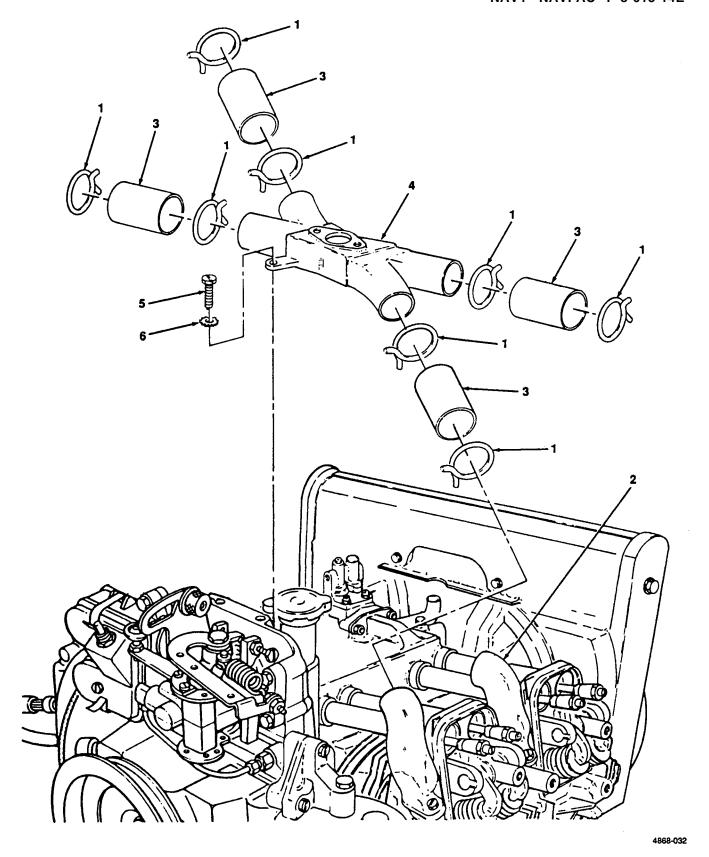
Intake Manifold and Intake Manifold Hoses and Clamps, Removal, Inspection and Installation.
